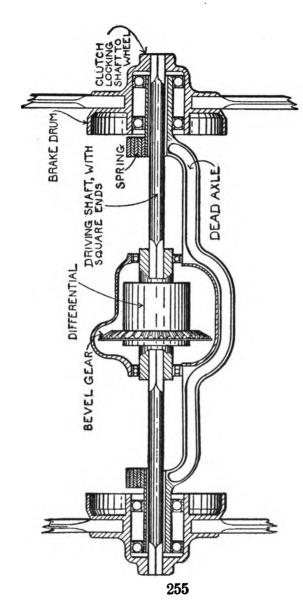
Drad Axiz with Driving Shaft. Axle supports bevel gear and differential. The driving shaft is supported in bearings at the differential end, and drives the wheels through clutches in the hubs.
